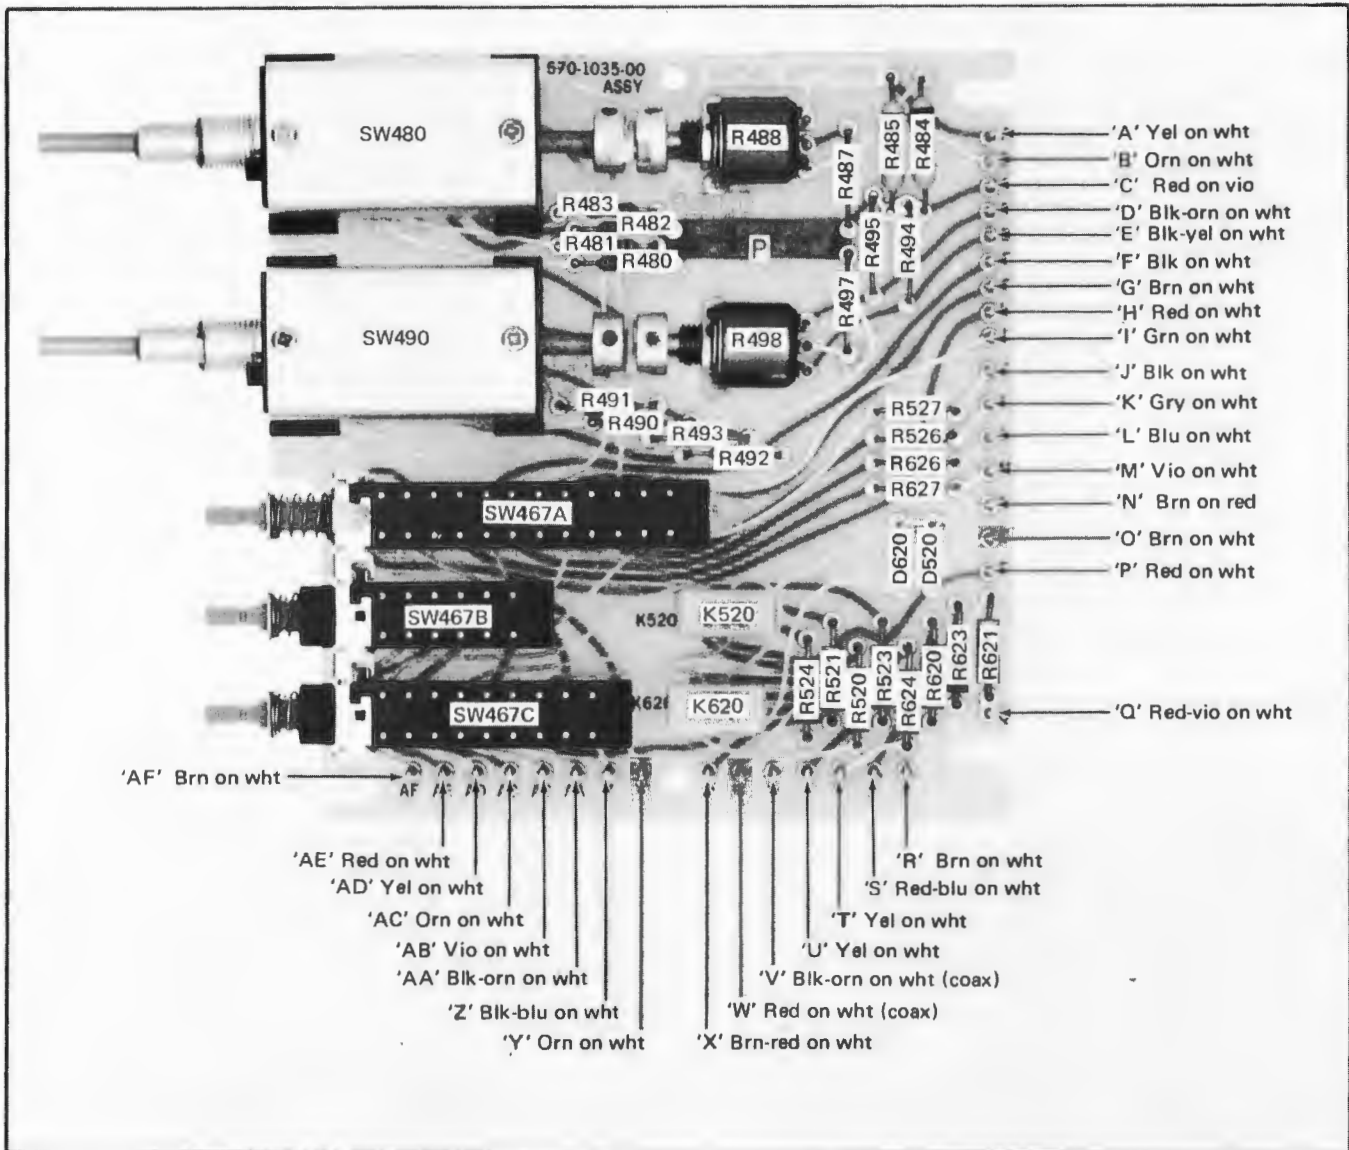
Component location and wiring color codes on Display Switching circuit board.
